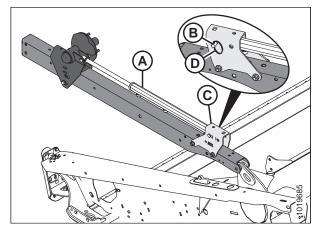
Left Reel Arm Cylinder in Aft Position
